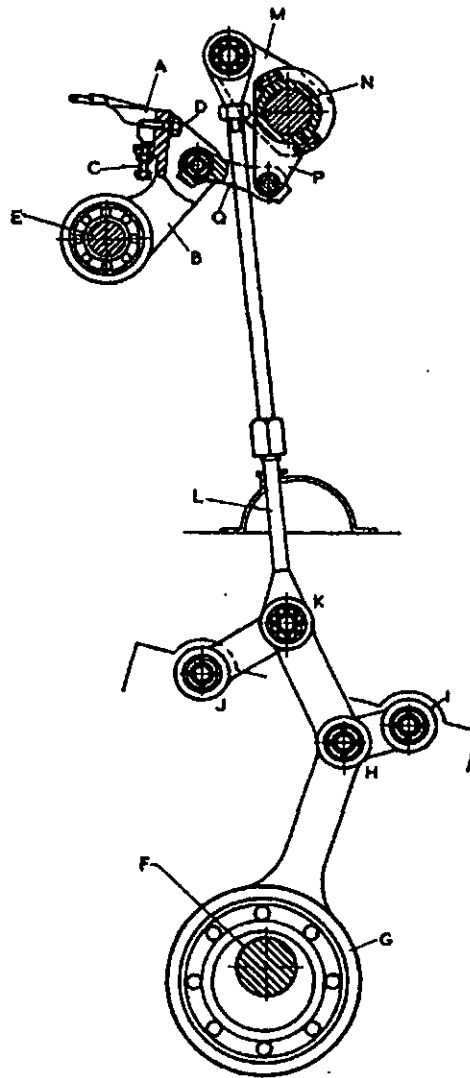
Sinker Bar Mechanism; Eccentric Drive. After RAZ (1987)
